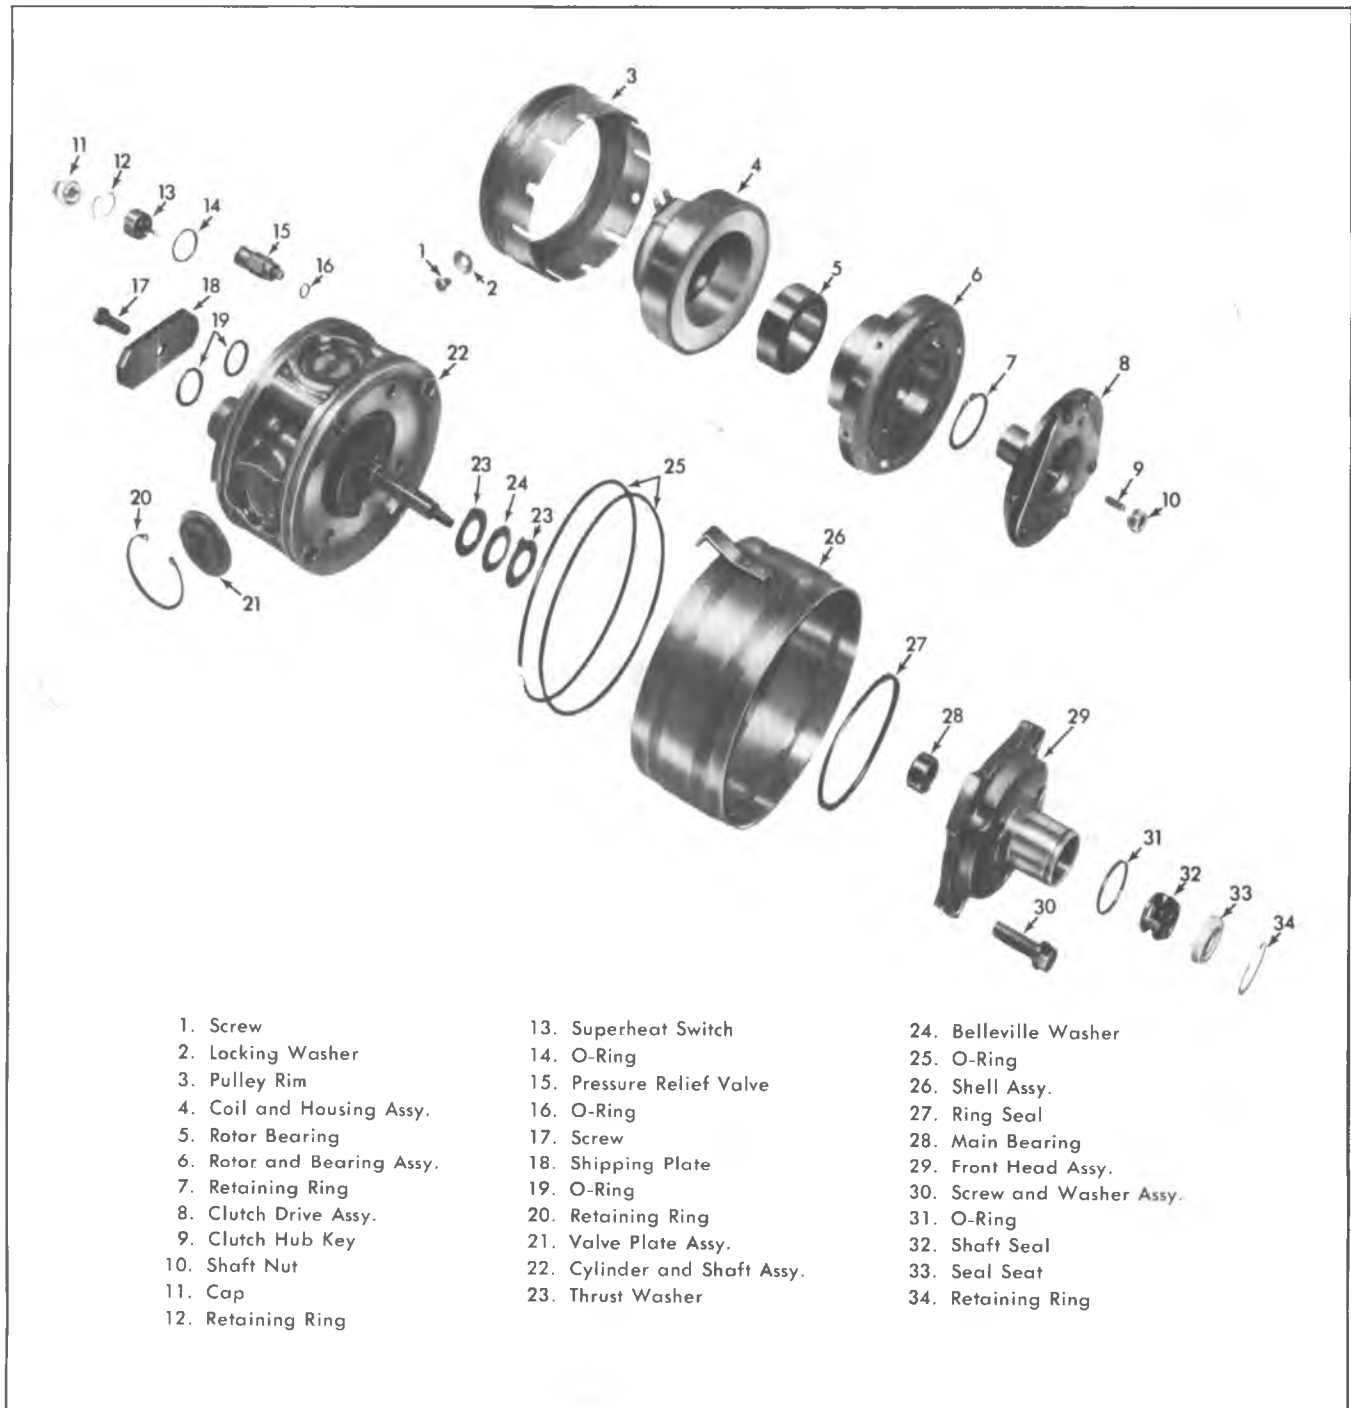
Radial Four Cylinder Compressor-Exploded View
